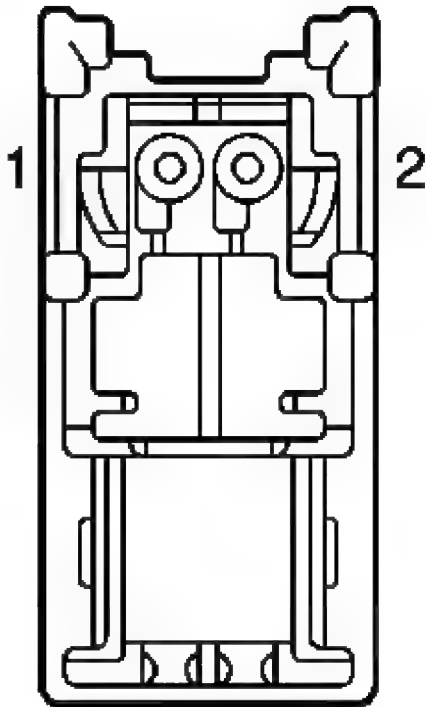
Seat Belt Pretensioner - LF Connector End View
